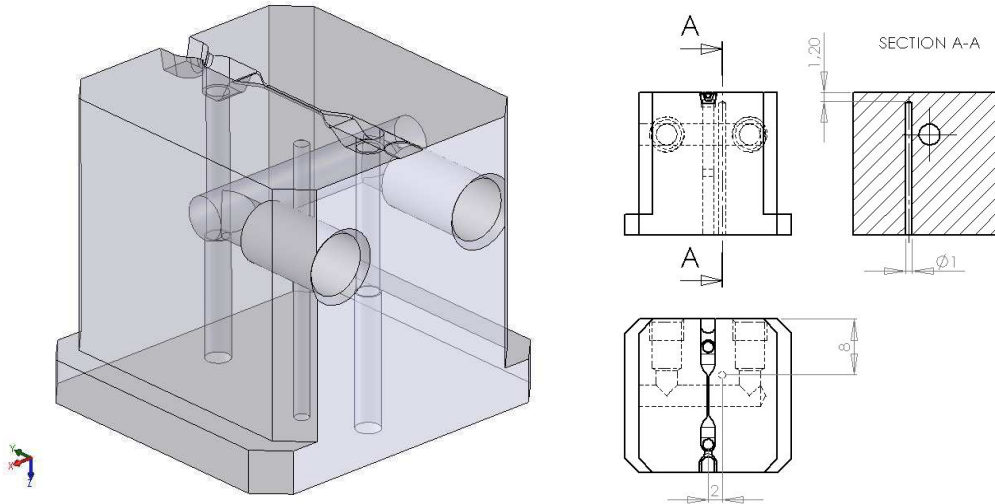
Moulding block showing the cooling circuit and the thermocouple location
